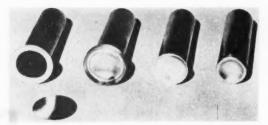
Typical application of ring weld technique of cold pressure welding may be seen in hermetically sealed containers. Steps shown (left to right) are flanged tube before welding, tube after welding, tube after excess metal has been trimmed off, and tube after weld has been dressed over.
